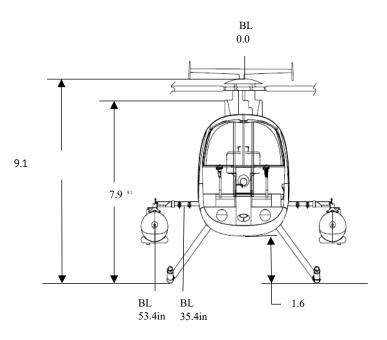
MD 530F Cayuse Warrior Principal Dimensions (Front)
